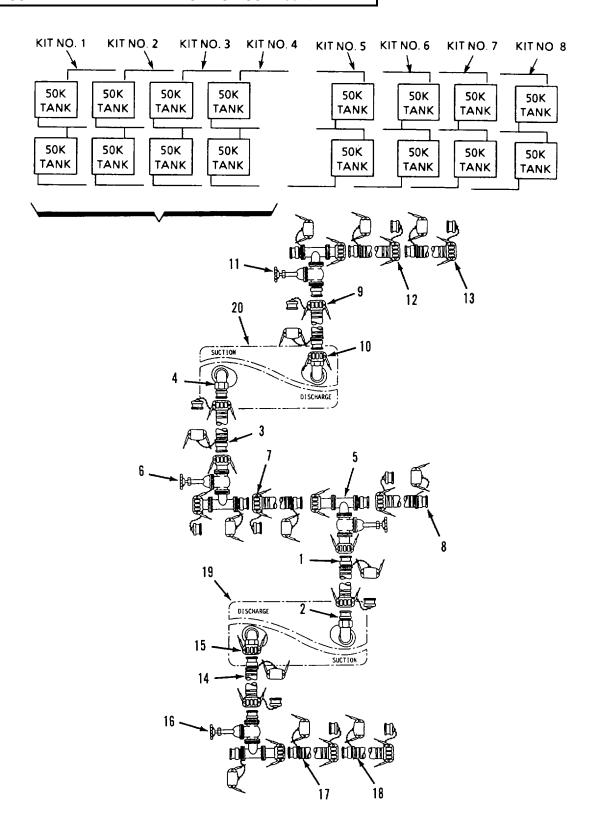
Dual Tank Connection Kit Assembly (sheet 1 of 2)
